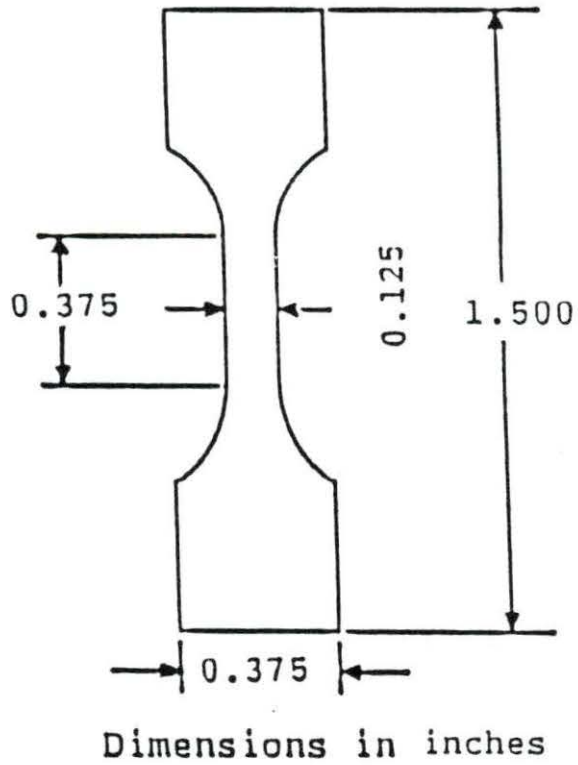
Sheet tensile sample, thickness, 0.127 inches
